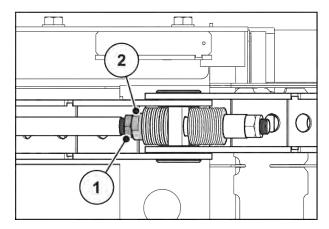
Changing holding tension on 2nd hydraulic cylinder
